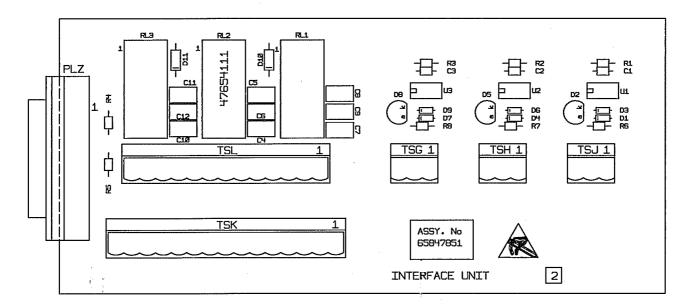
Serial Interface Unit 65847A – PCB Assembly
